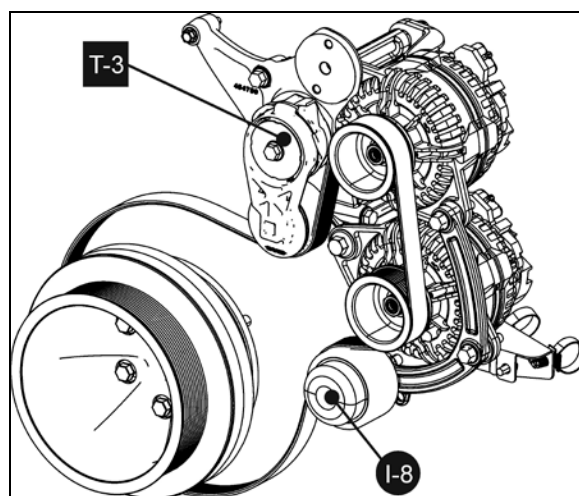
IDLER AND AUTOMATIC BELT TENSIONER ON ALTERNATOR DRIVE
